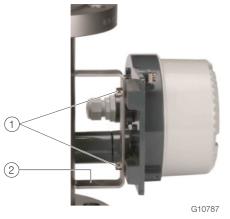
(1) Hexagon socket screws (2) Mounting bracket
